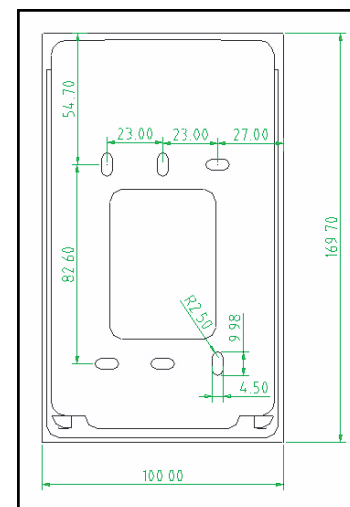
Diagram of the Hole Locations in the Mounting Plate
